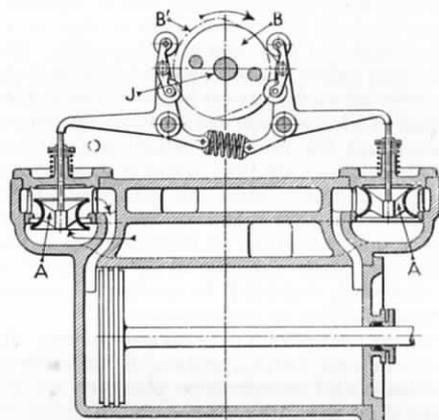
SECTION THROUGH CYLINDER AND INLET VALVES.
